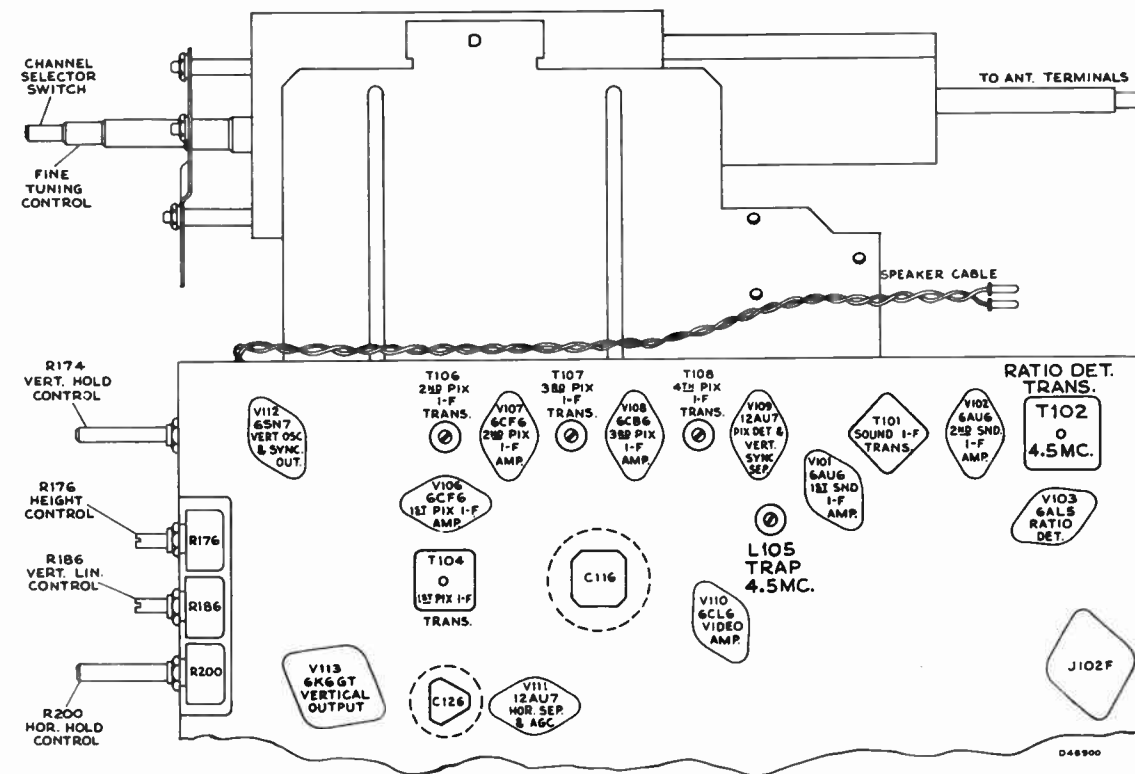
Bottom Chassis Adjustments (KRK11B Tuner Shown)
